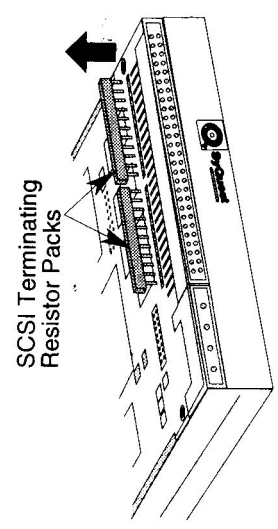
Locating and Removing the SCSI Terminating Resistor Packs
